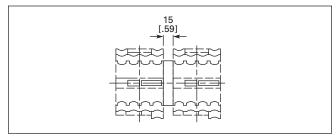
Frame L – M. XTCEXMLM Mechanical Interlock — Approximate Dimensions in mm [in]
